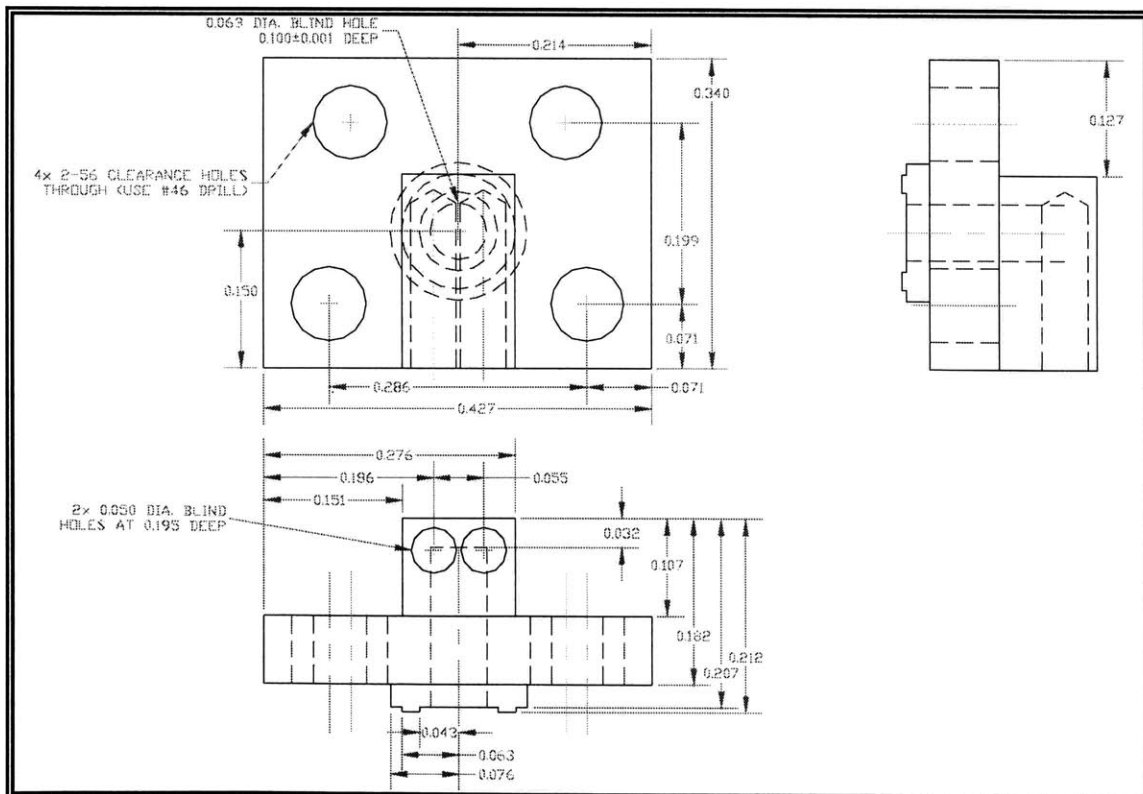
This technical drawing of the high-pressure flange reveals an intricate feature on the male portion of the part, a tiny ridge used for deforming a copper gasket seal
